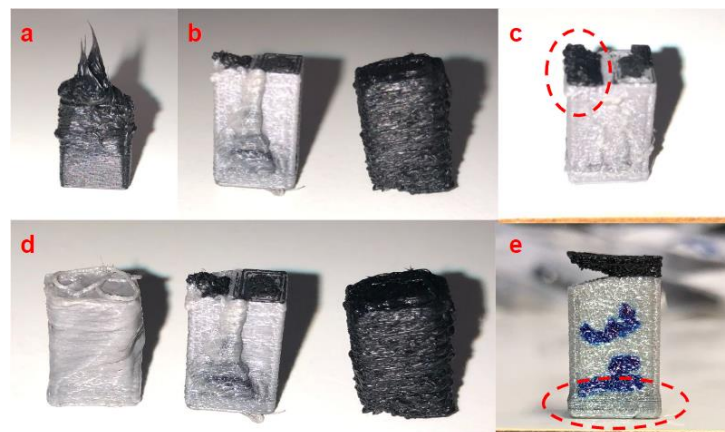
Printing defects: a – Unable to print, sample 16; b – Poor or rough surface, sample 26; c – Uneasy support removal, sample 44; d – Inconsistent extrusion, samples 26 and 14; e – Warping, sample 34.
